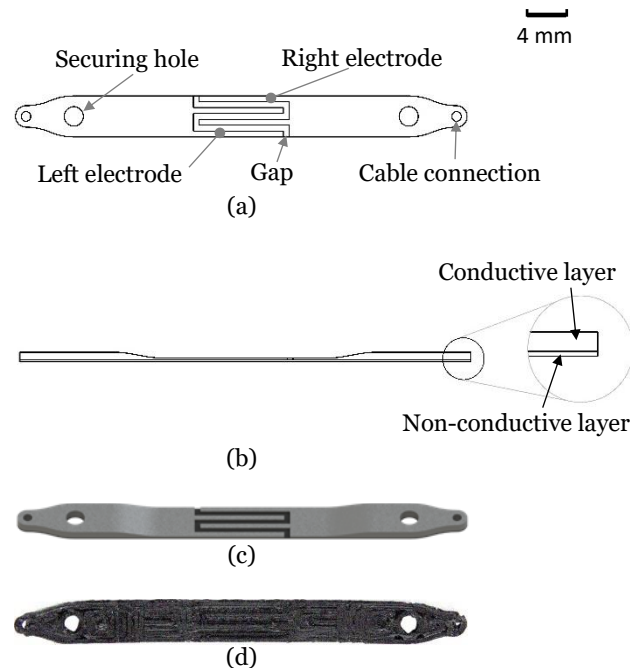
Front (a) and side (b) view of the drawing, render (c) and picture (d) of the AMRS₁ sensor.
